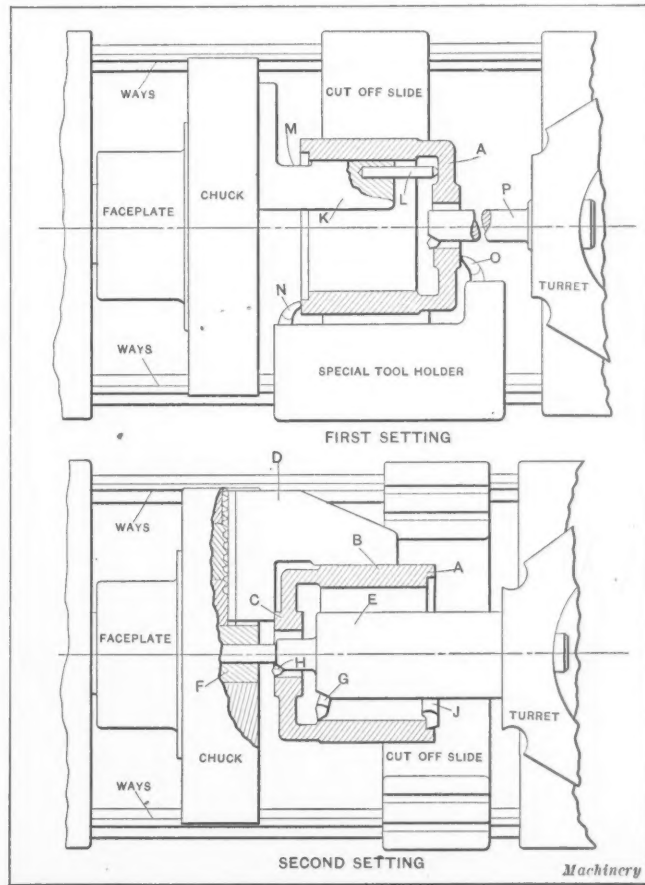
First and Second Settings for boring and facing Steel Casting A
